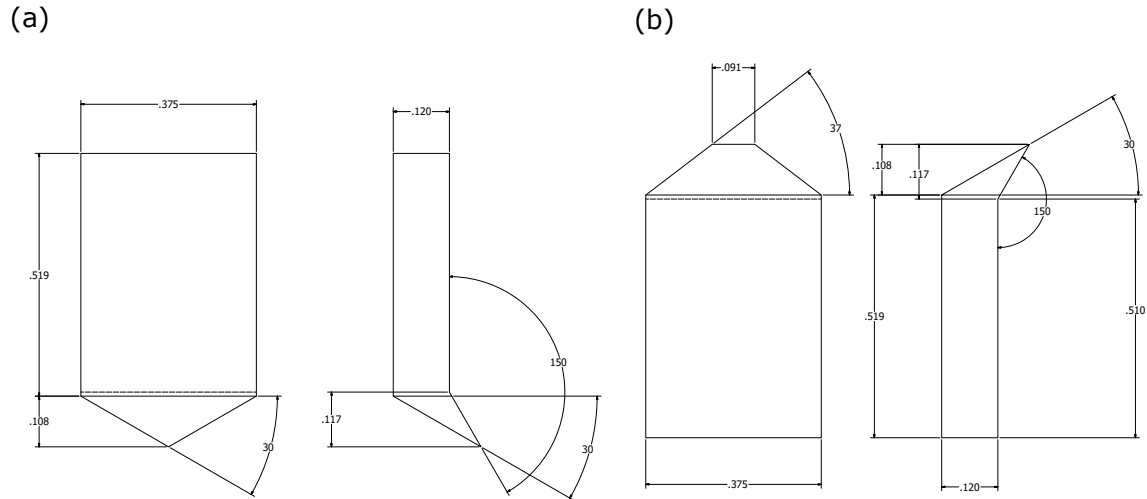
Dimensions of top (a) and bottom (b) pole pieces, machined from Hiperc 50A.
